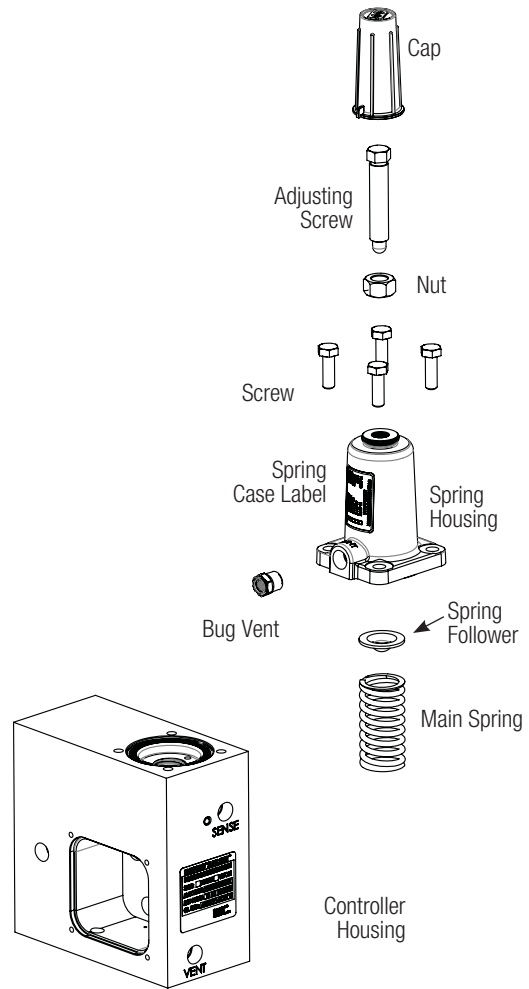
Controller Assembly and Disassembly (Single Function Shown)
